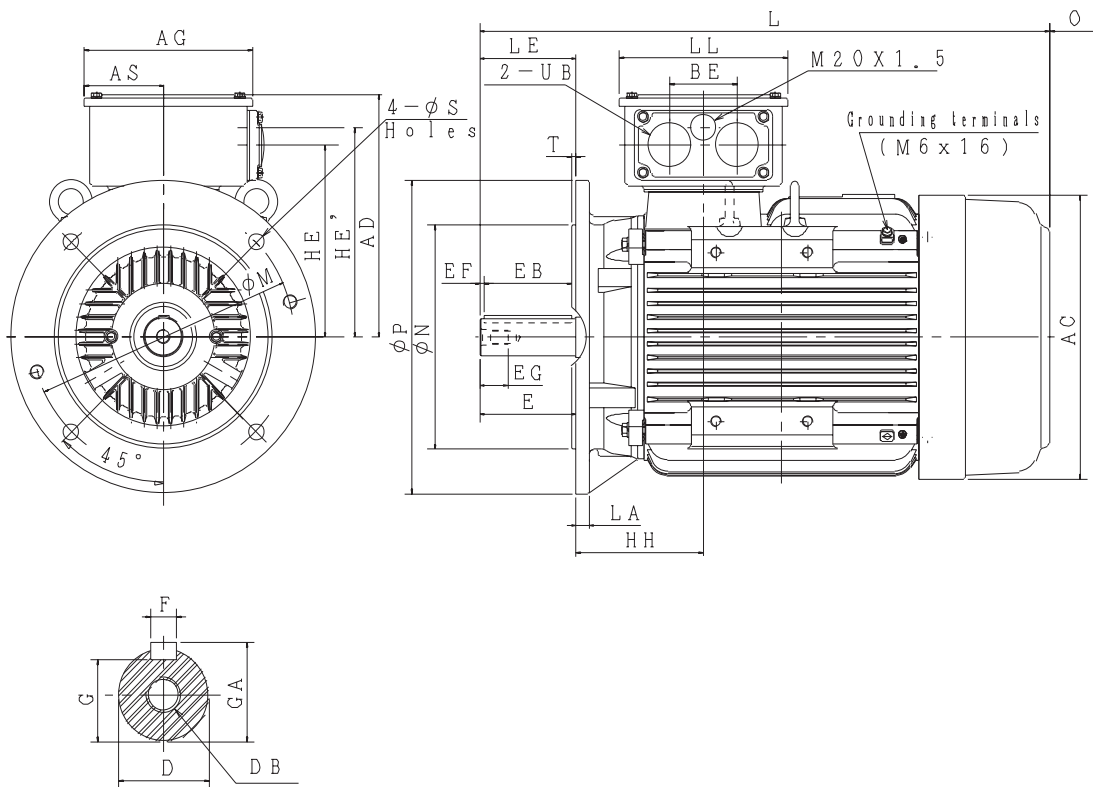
Outline drawing of cast iron design, feet version, mounting B5; frame size 160M - 180L
